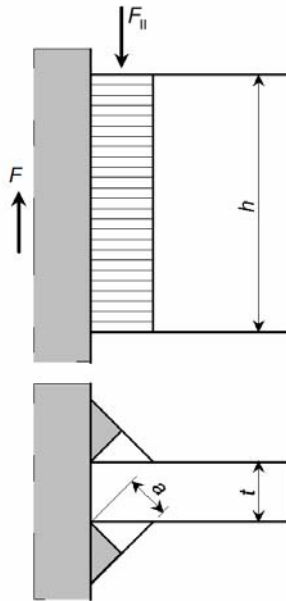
Double fillet welded joint loaded parallel to the weld axis (CEN 2002).
